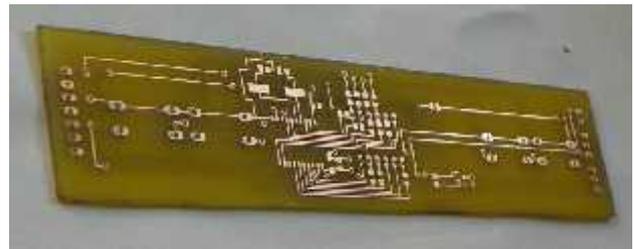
Final circuit diagram result after corrosion (removal of copper which is useless) - side one
